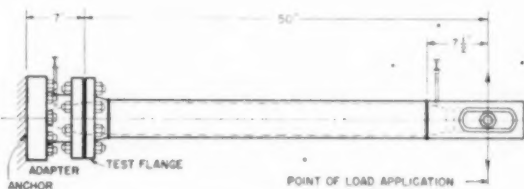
DIAGRAM OF TEST ASSEMBLY
